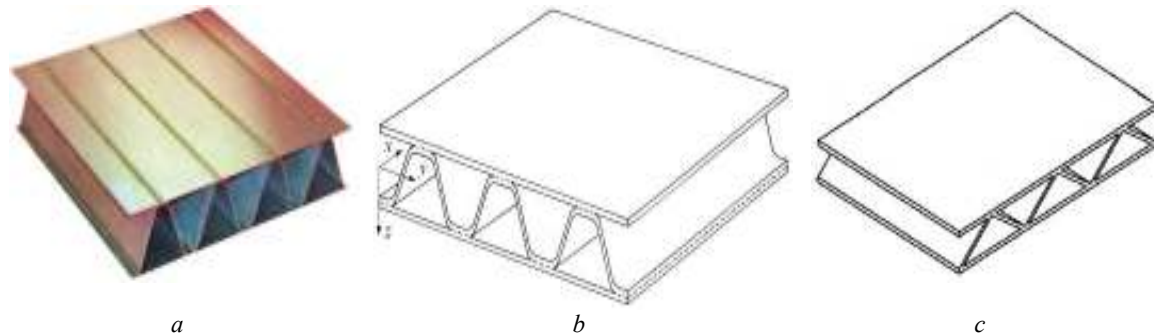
Lightweight sandwich plates with corrugated cores: a) steel laser-welded panel, b) panel from dissimilar materials assembled by adhesive bonding, c) metallic panel assembled by brazing
